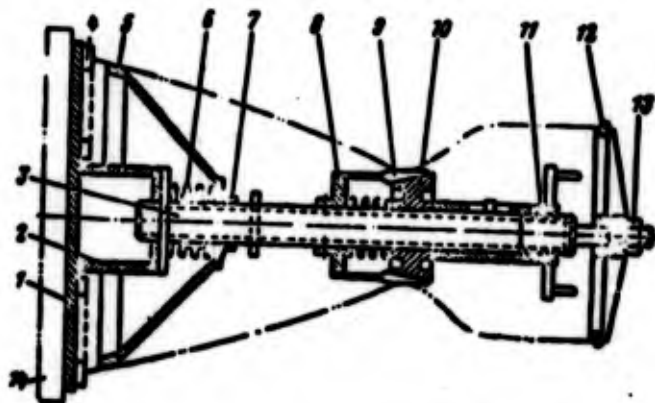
Device for welding of the middle and nozzle parts of the KS:
